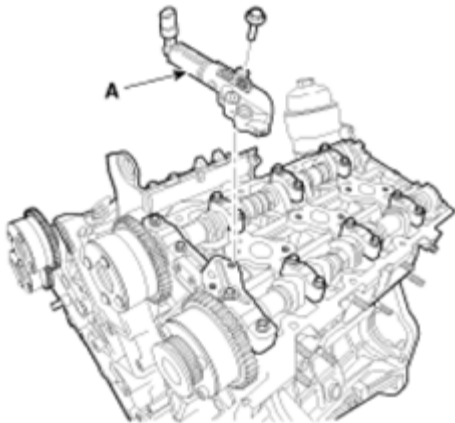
Identifying Exhaust Camshaft OCV (1 Of 2)
